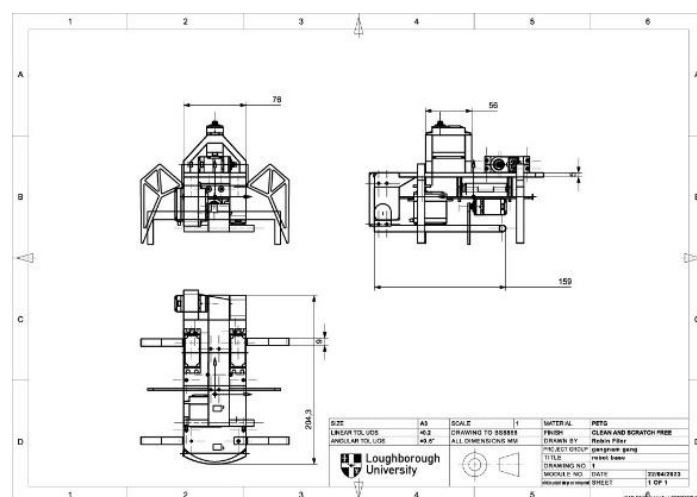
Show a engineering sketch of the Ladybug (Stamp Bug) with the appropriate dimensions
